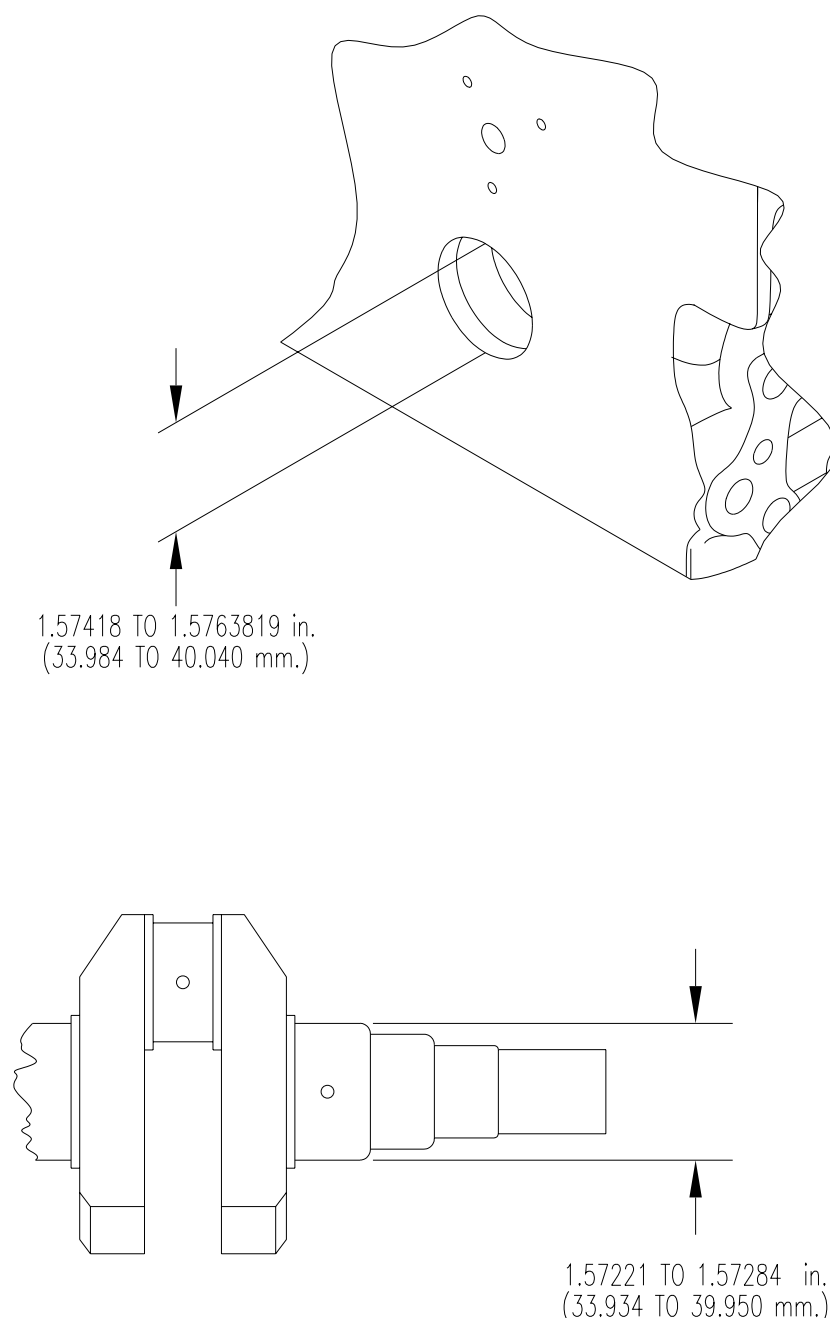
Crankshaft Bearing 1 (Sheet 1 of 2)
